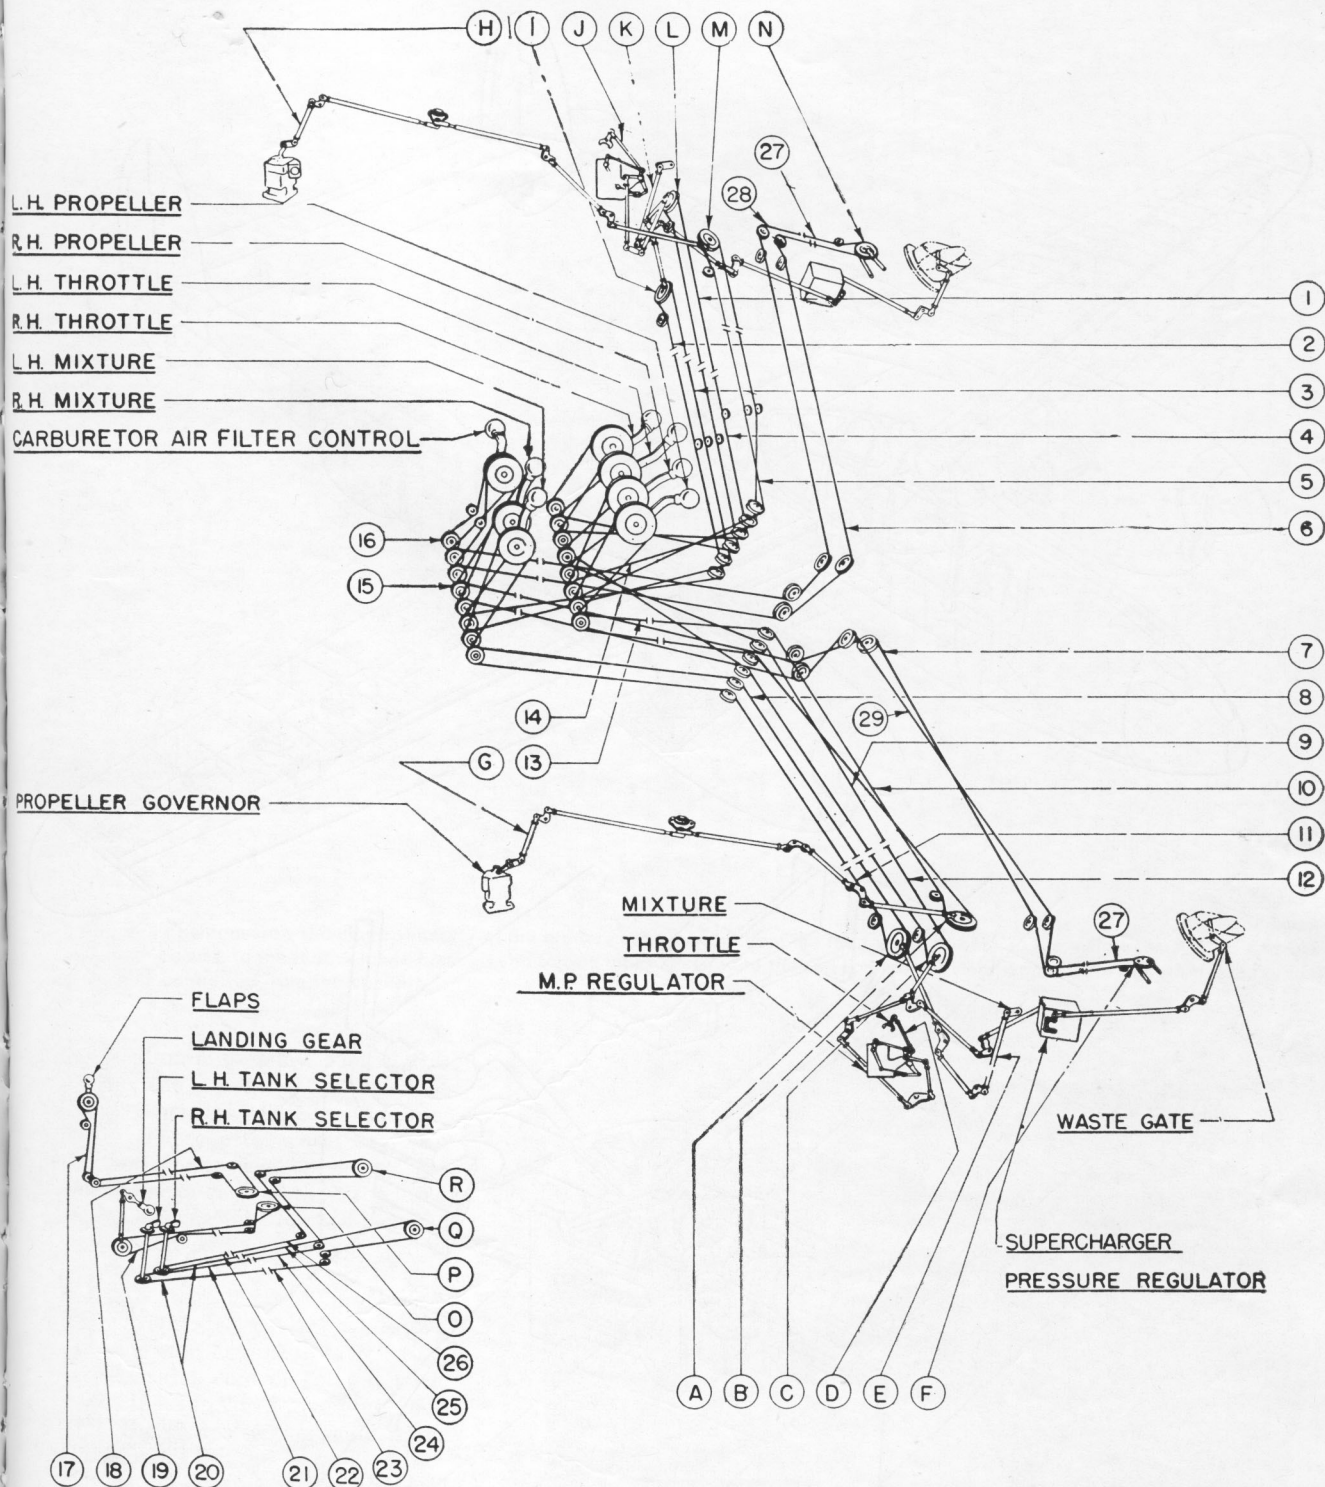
Phantom view of the wing flap, landing gear, and engine control system showing: (1) right throttle; (2) and (3) right mixture; (4) right throttle; (5) right propeller; (6) right carburetor air, center; (7) left carburetor air, center; (8) left mixture; (9) left throttle; (10) left propeller; (11) left mixture; (12) left throttle; (13) left propeller; (14) right propeller; (15) and (16) left and right carburetor air forward; (17) and (18) fore-and-aft flap four-way valves; (19), (20), and (21) left and right tank selectors; (22) right tank selector; (23) left selector; (24) right tank selector; (25) left tank selector; (26) right tank selector; (27) left and right carburetor air, aft; (28) and (29) right and left carburetor air, center; (A), (B), and (C) pulley bracket assemblies; (D) allison rod, left throttle; (E) rod, left mixture; (F) pulley bracket assembly; (G) and (H) rods, left and right propeller governors; (I) pulley bracket assembly; (J) allison rod, right throttle; (K) rod, right mixture; (L), (M), and (N) pulley bracket assemblies; (O) pulley; (P) pulley assembly; (Q) and (R) drums.
